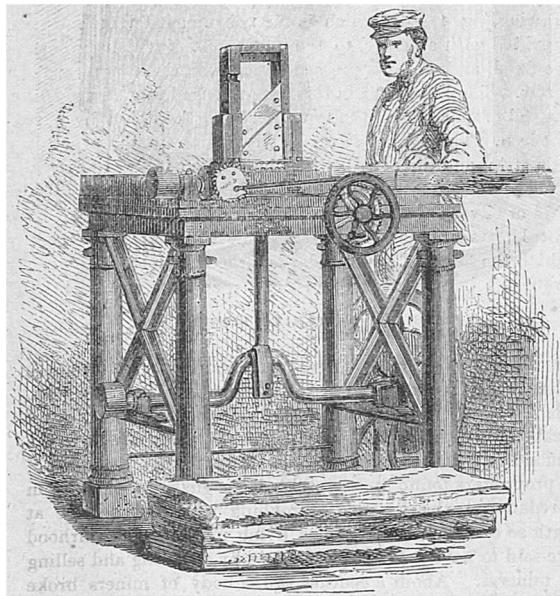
MACHINE FOR CUTTING THE ENDS OF PENCILS.
